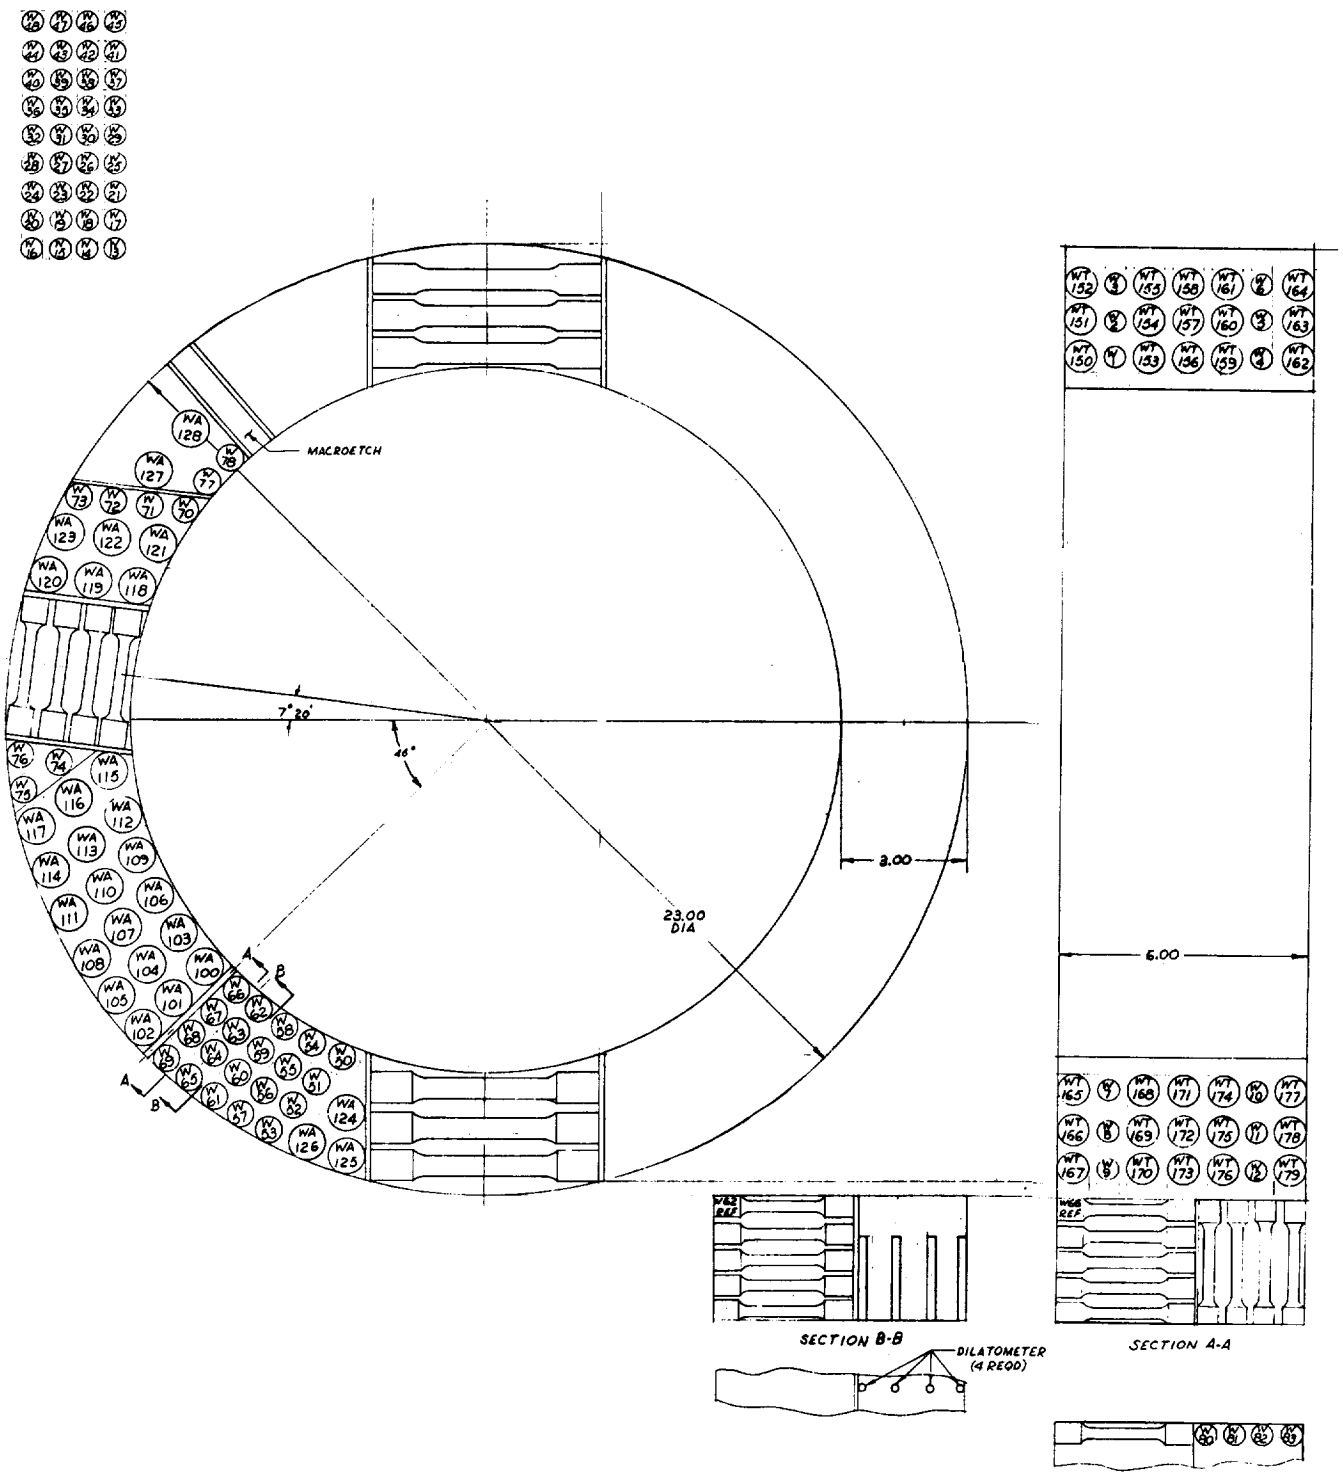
Specimen Layout Plan, Forging Heat 261-5-4000
